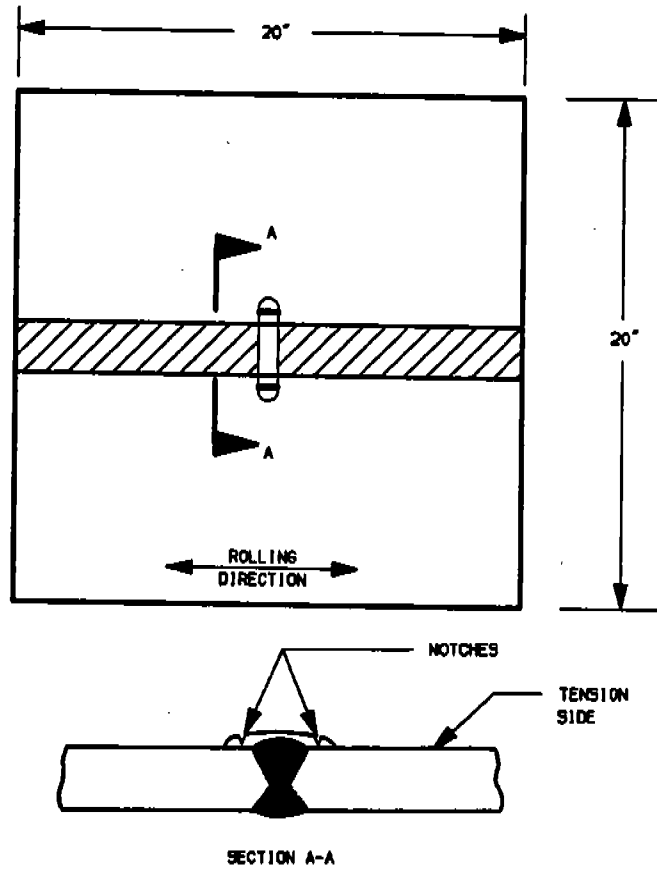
EXPLOSION BULGE WELDMENT CRACK STARTER CONFIGURATION
